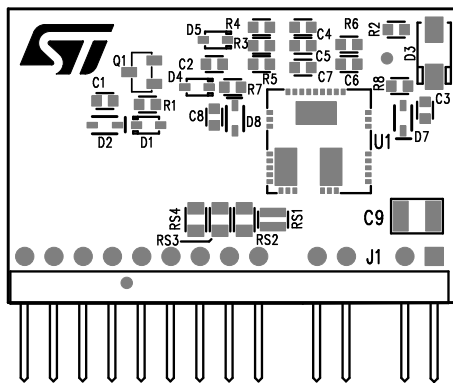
Daughterboard PCB layout - 4 Layer FR4 (inner 1)
